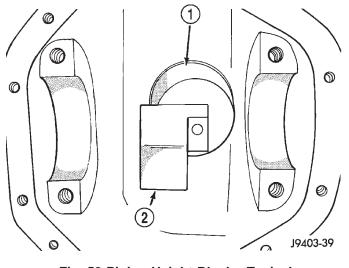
Pinion Gear Depth Gauge Tools—Typical
